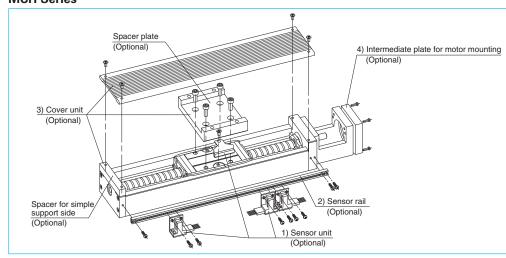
Assembly: Optional components for MCH10 (example)
